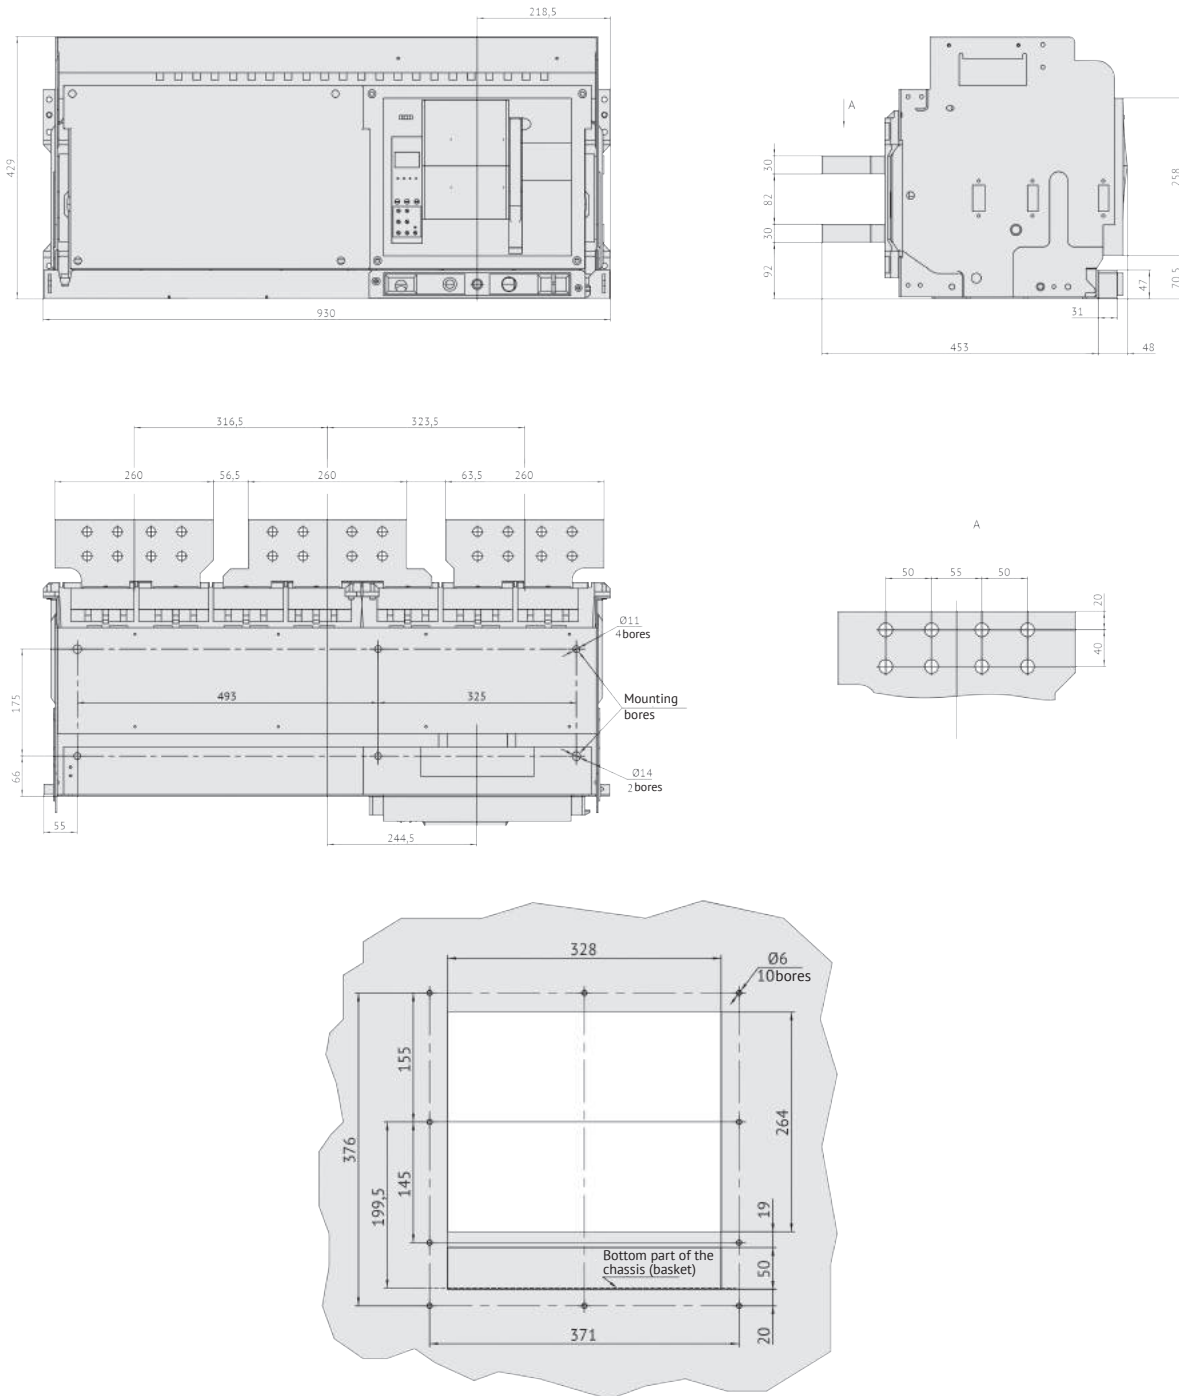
dimension retractable (withdrawable) circuit breakers
